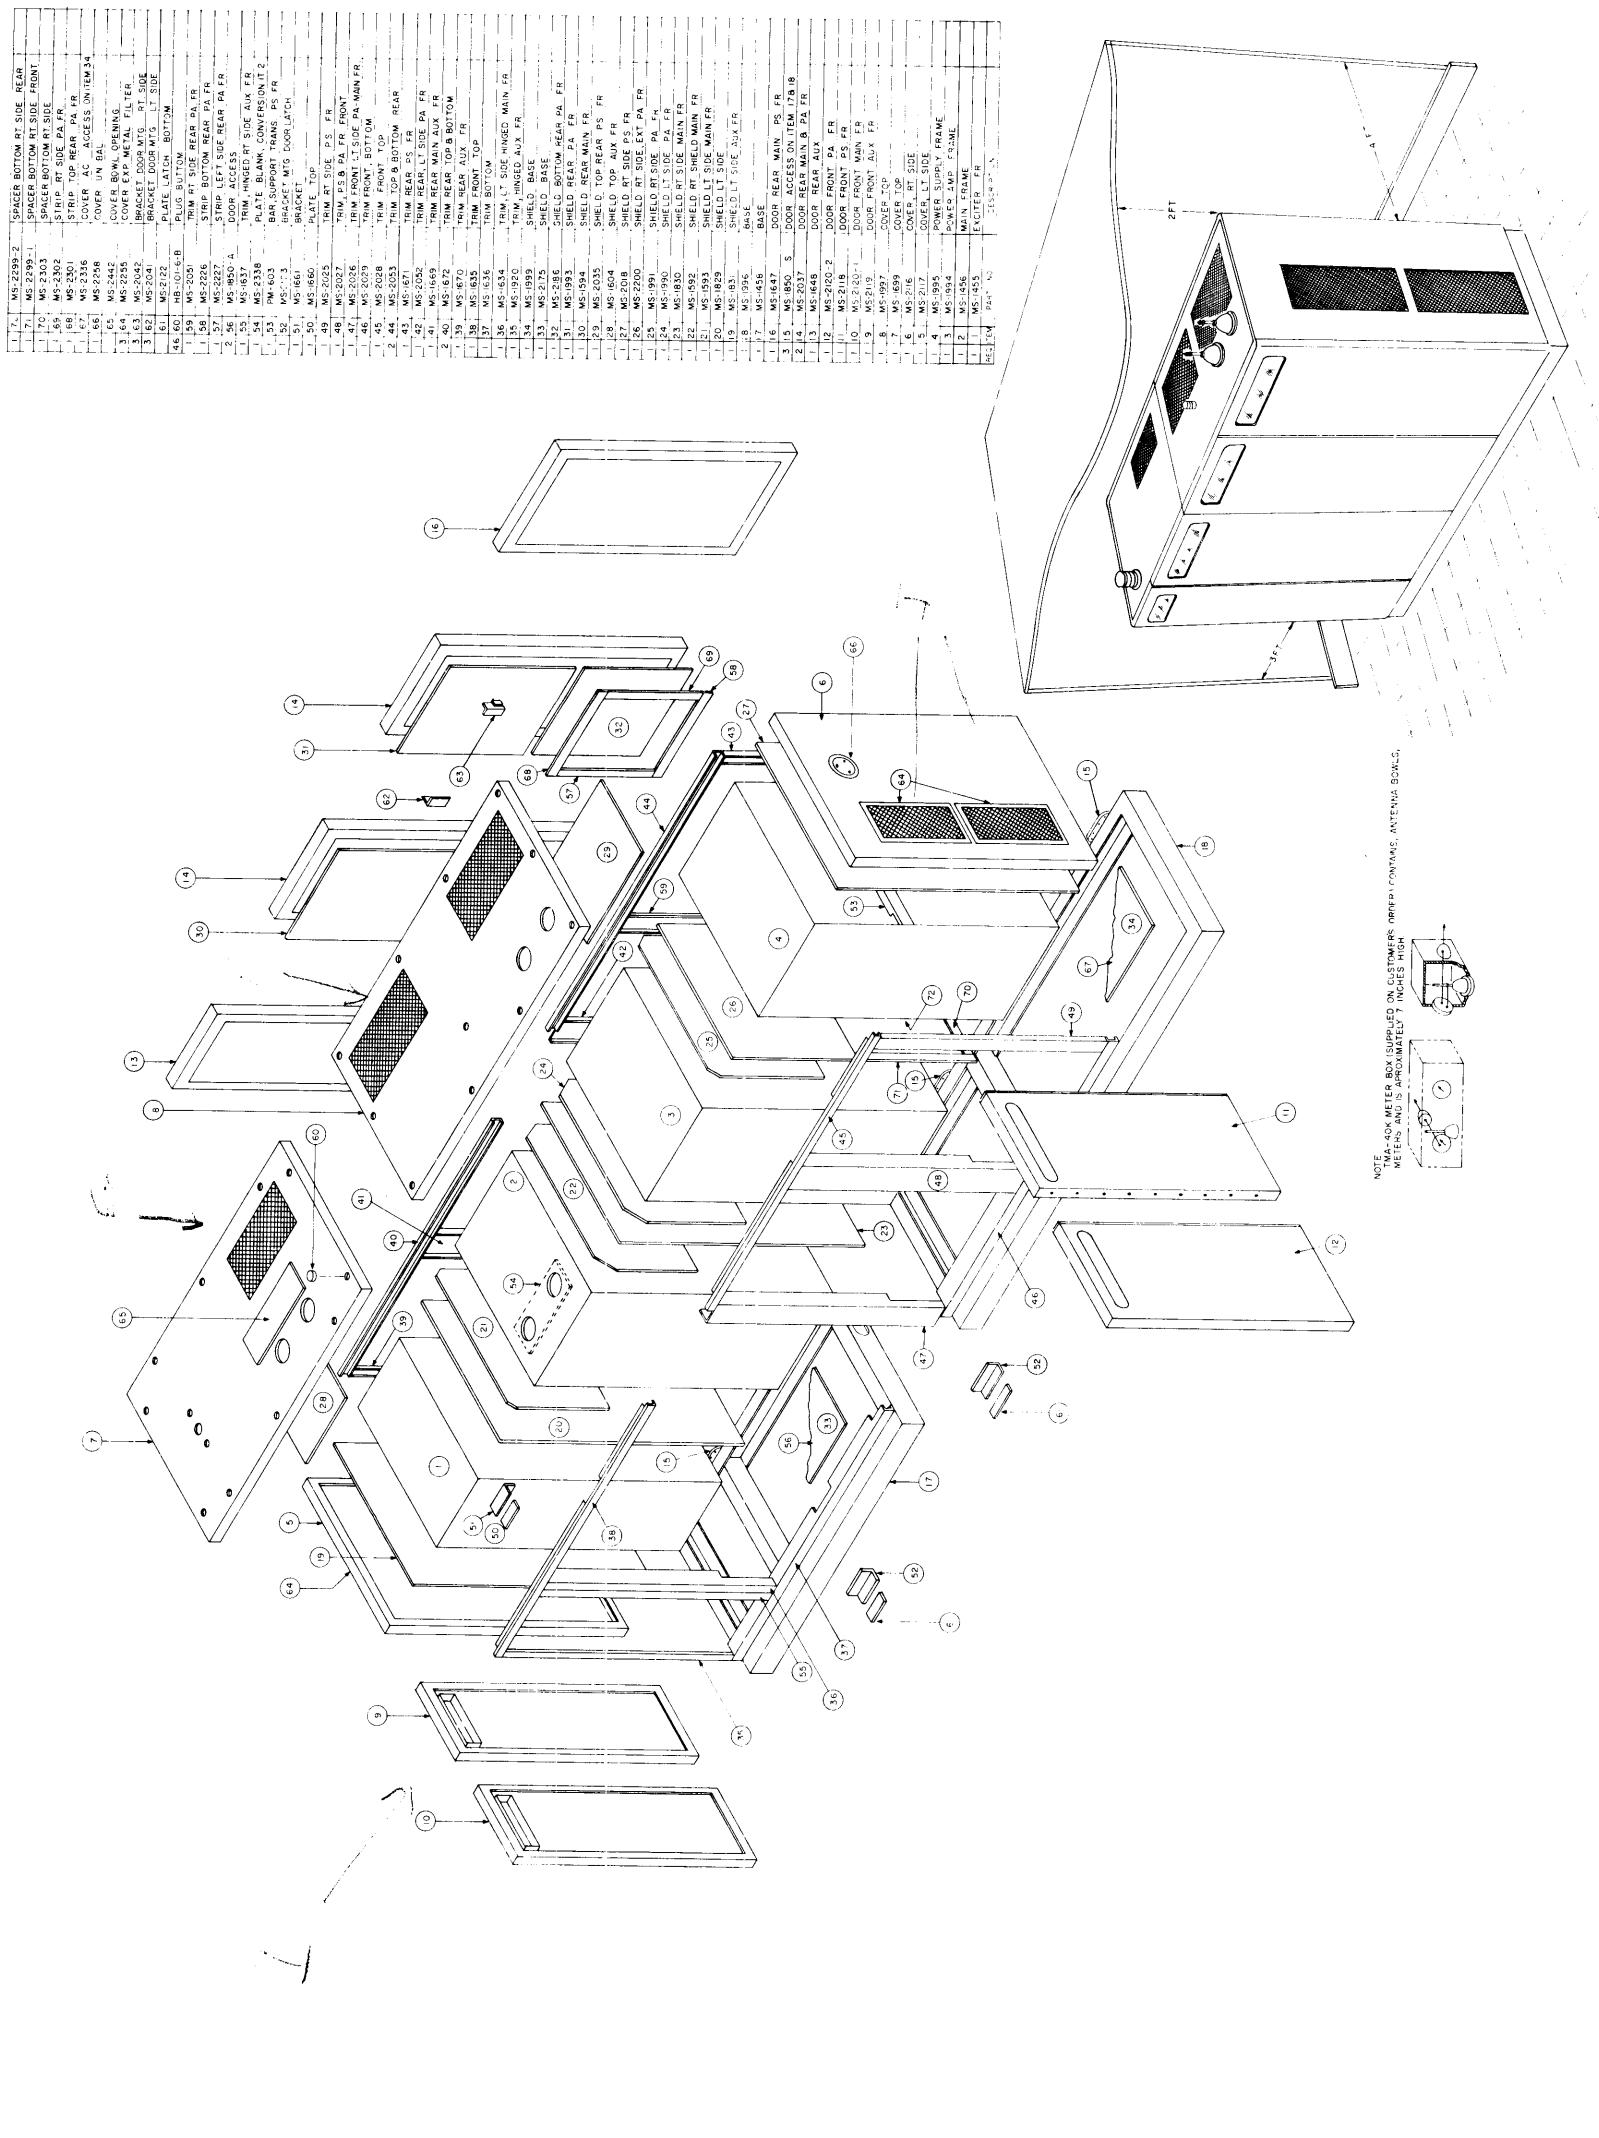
Assembly Drawing, Exploded View, GPT-40K
